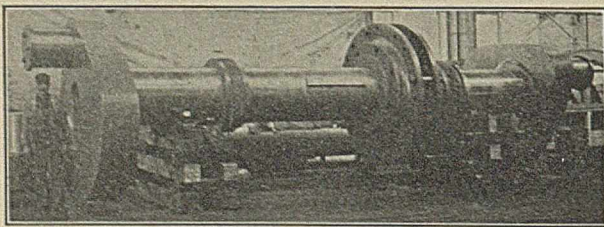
Crank shaft of 5000 H. P. Allis-Chalmers 4-cycle, double-acting twin-tandem gas engine—weight of this part, 85 tons.
